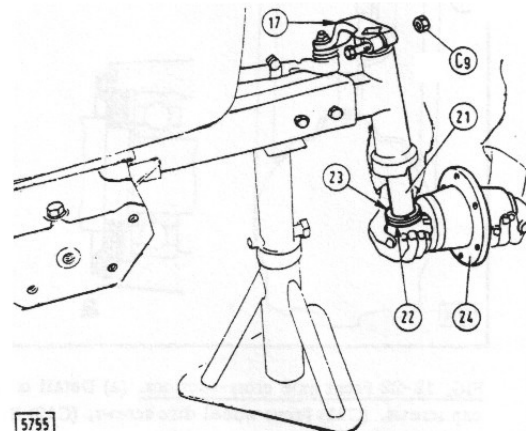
Fitting (removing) steering spindle (21) complete with wheel hub (24). (C9) Steering lever (17) set screw. (17) Steering lever. (22) Bronze thrust washer. (23) Steel thrust washer.
